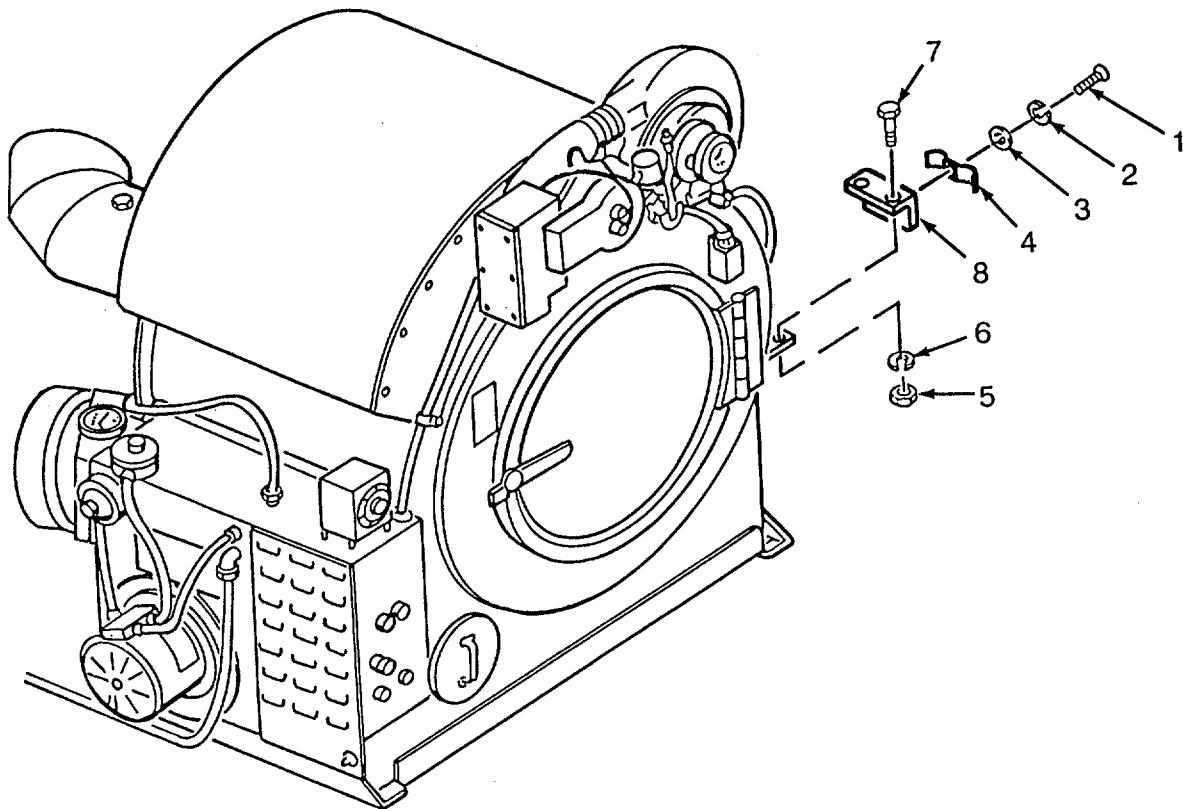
Bracket Assembly (Nonmetallic Hose)
